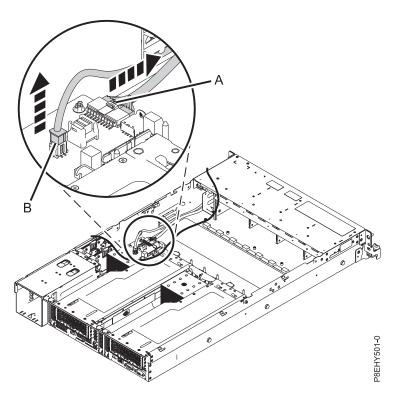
Removing the front USB cable and the power switch cable from the system backplane and the disk drive and fan card
